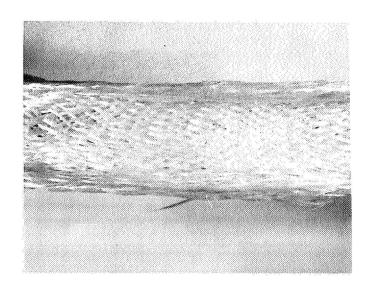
CLOSEUPS OF WOVEN I-BEAM FABRIC ATTACHED TO MOLDED BEAM COMPONENT
